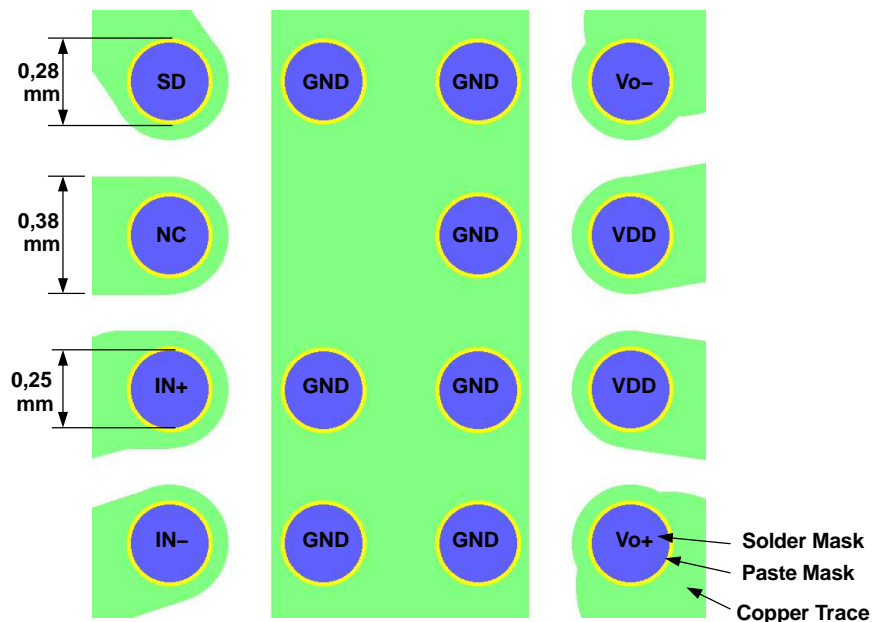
TPA2005D1 MicroStar Junior BGA Board Layout (Top View)
